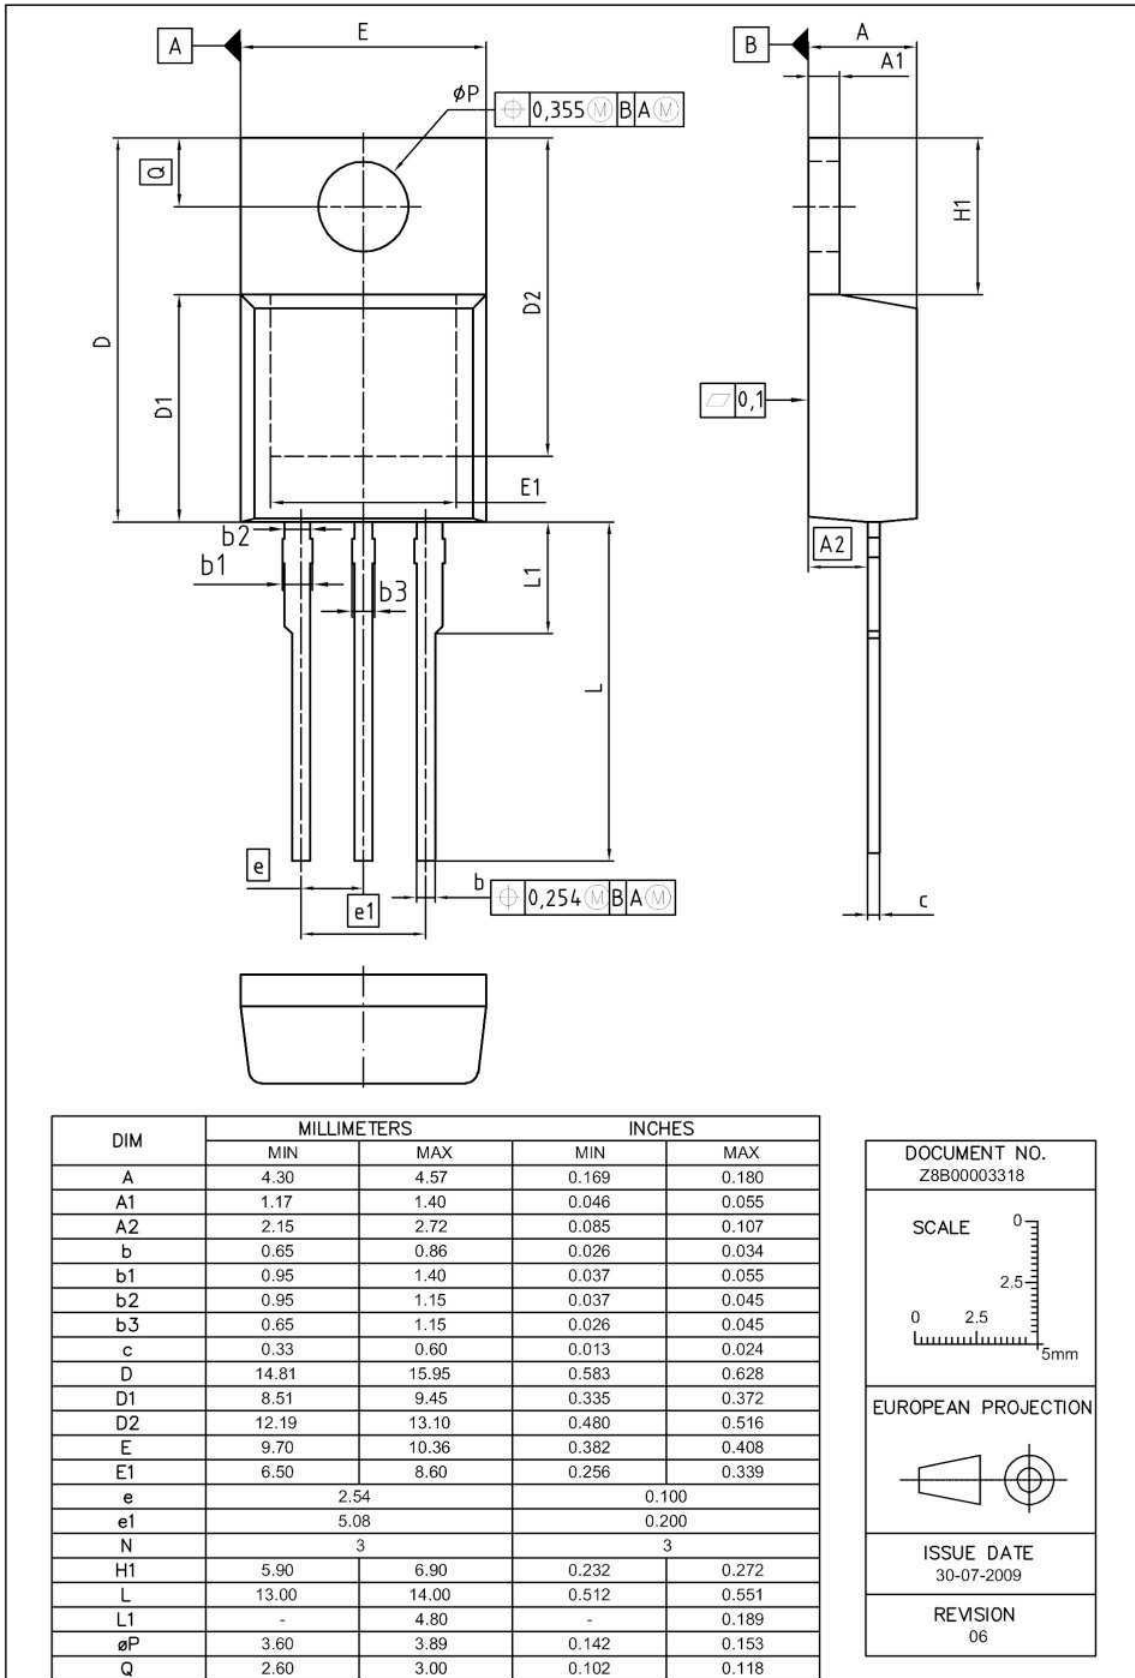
Outline PG-TO 220, dimensions in mm/inches
